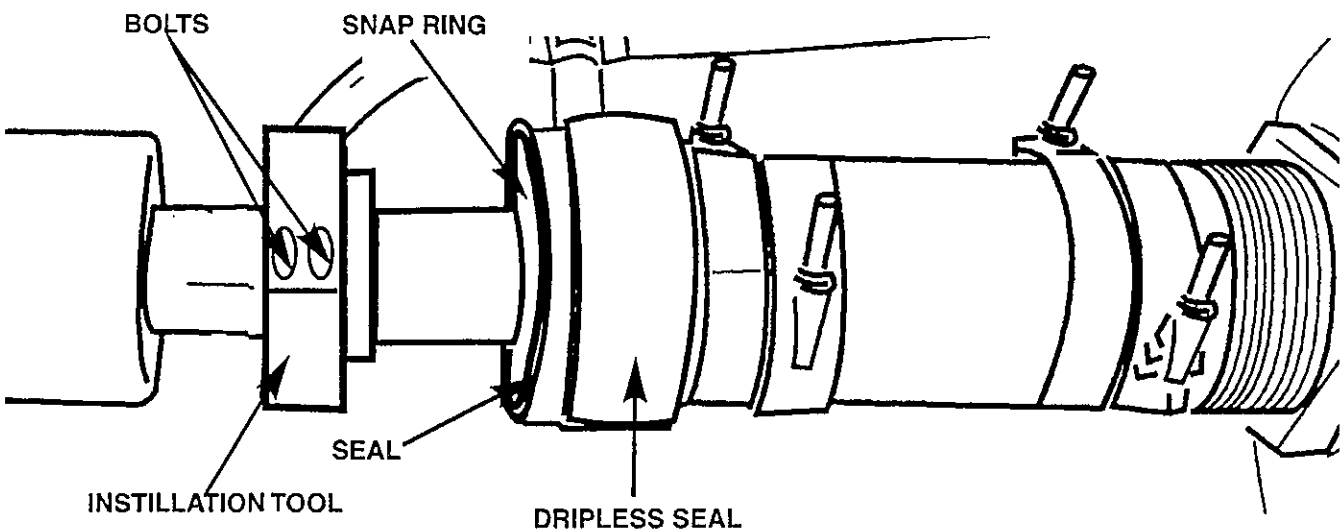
Propeller Shaft Dripleless Seal Replacement
